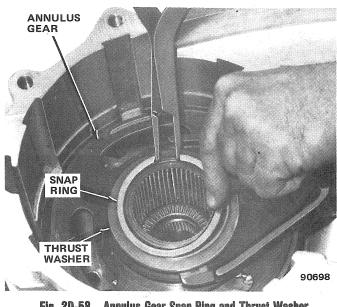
D-58 Annulus Gear Snap Ring and Thrust Washer Removal/Installation (30) Remove annulus gear and range fork as assembly (fig. 2D-59). Separate components for cleaning and inspection.
